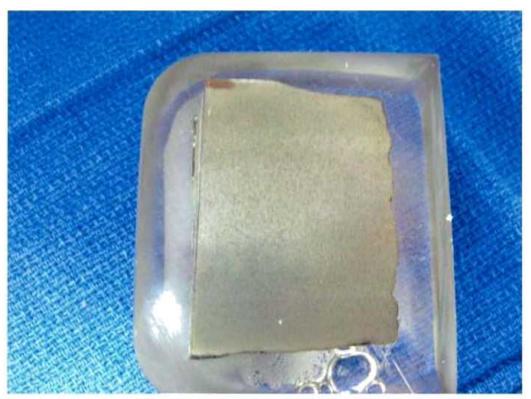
Microsection made below fracture surface at location 3 in fig. 20.
